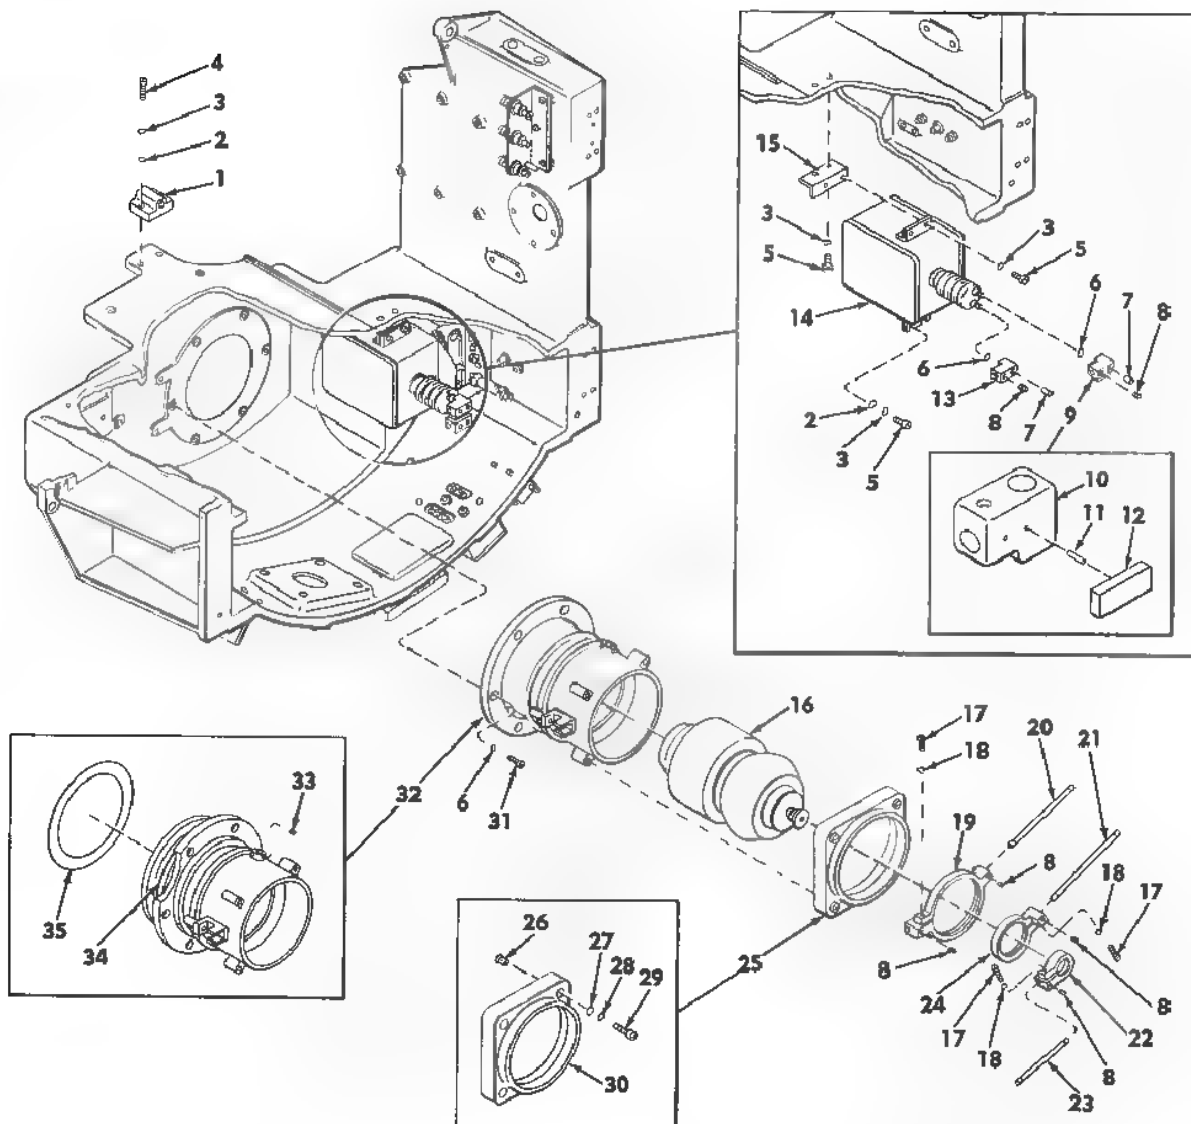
MODULATOR /8172445/-PARTIAL EXPLODED VIEW
